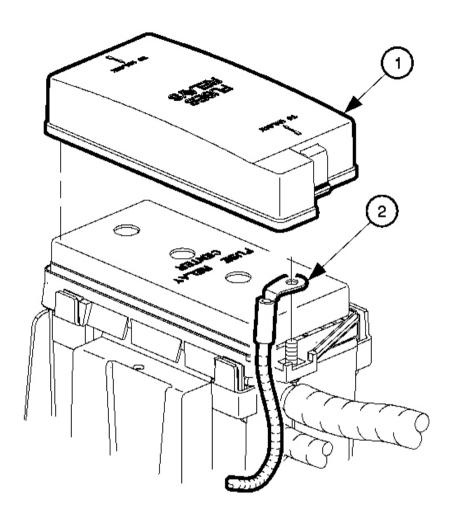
Removing/Installing Underhood Electrical Wiring Courtesy of GENERAL MOTORS CORP.
